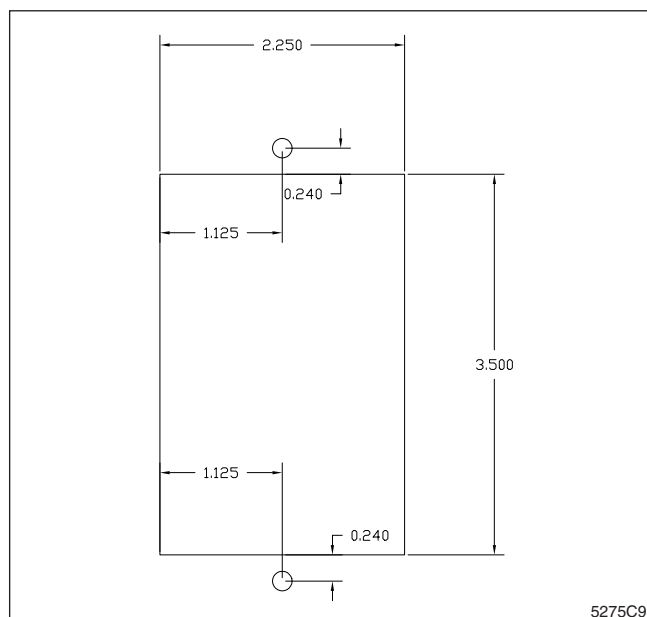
Panel Cutout Dimensions (dimensions in inches)
